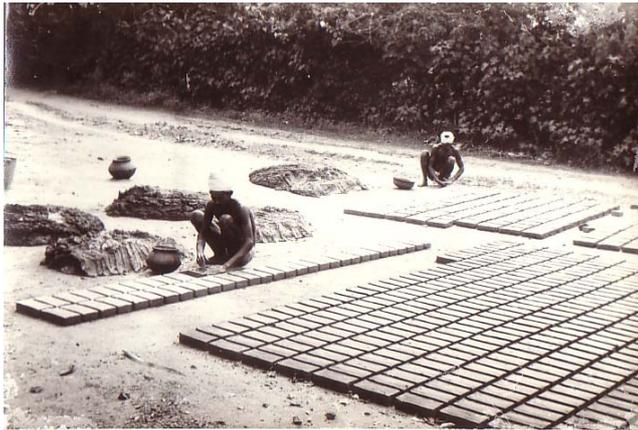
Brick making, Kottakarai, Auroville, 1984, Source: Angad Vohra
